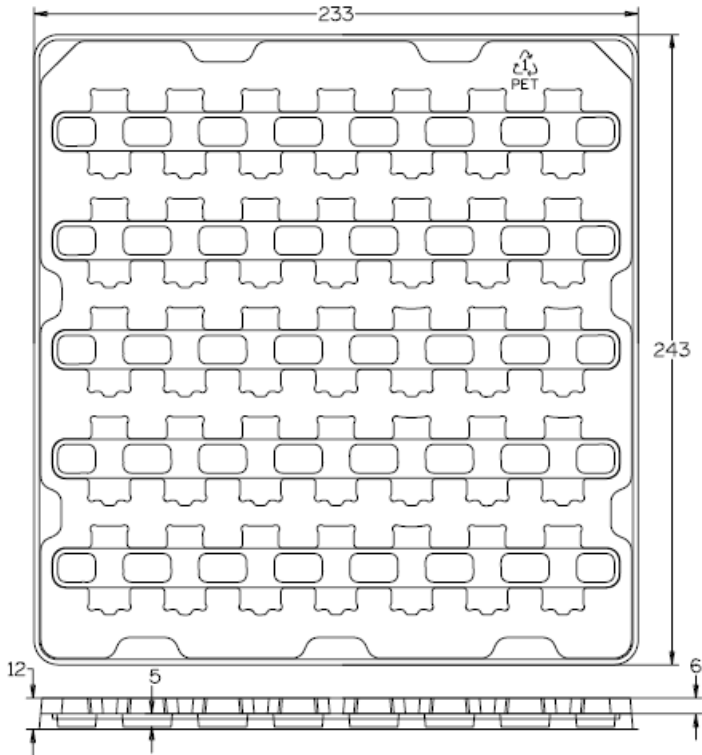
Package ray dimension for S2000 LXSx-PWxx-0017.
